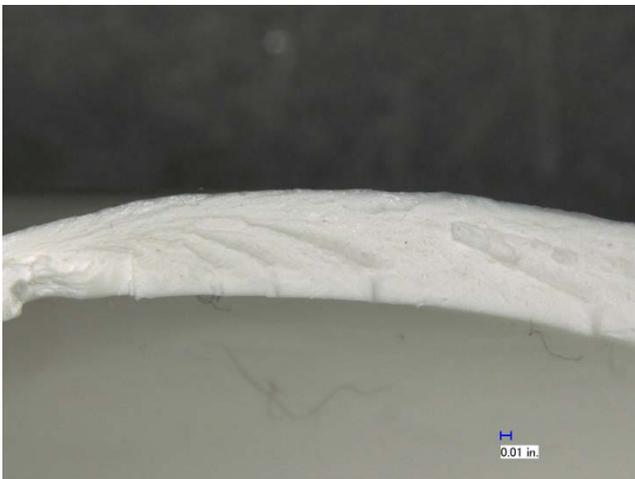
Photomicrograph showing the fracture surface remote to crack origins on the PVC fracture surface.
